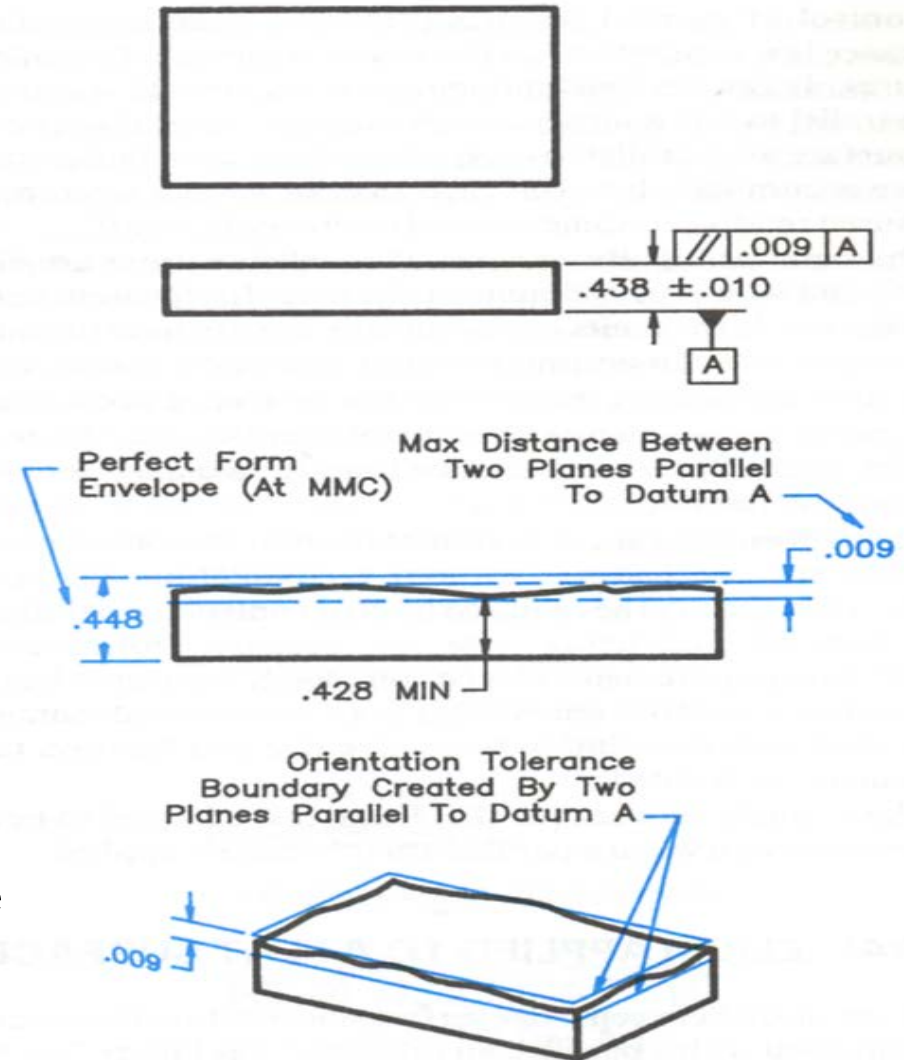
Two planes form the boundary for a parallelism tolerance.
